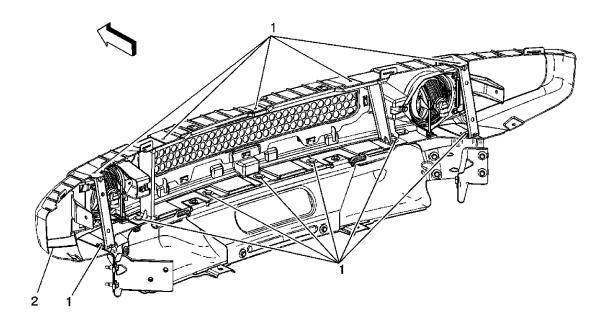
Identifying Front Bumper Intermediate Filler & Fasteners Courtesy of GENERAL MOTORS CORP.
